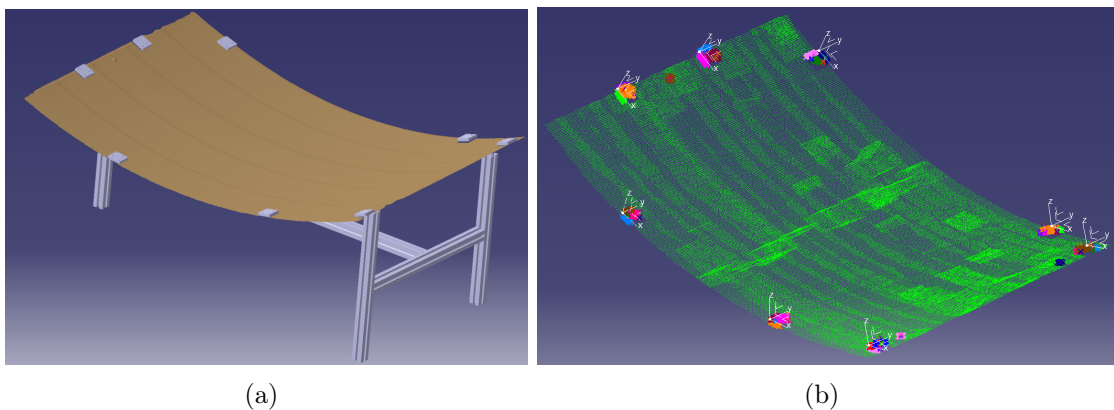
(a) Mini fuselage component on the supporting stand with the target plates; (b) T-scan measurement
